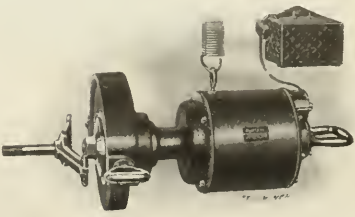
Hisey-Wolf Portable Electric Grinder with Removable Handle in Line with Spindle
